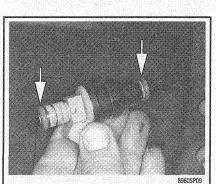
Replace the injector O-rings before installing the injectors back into the engine
